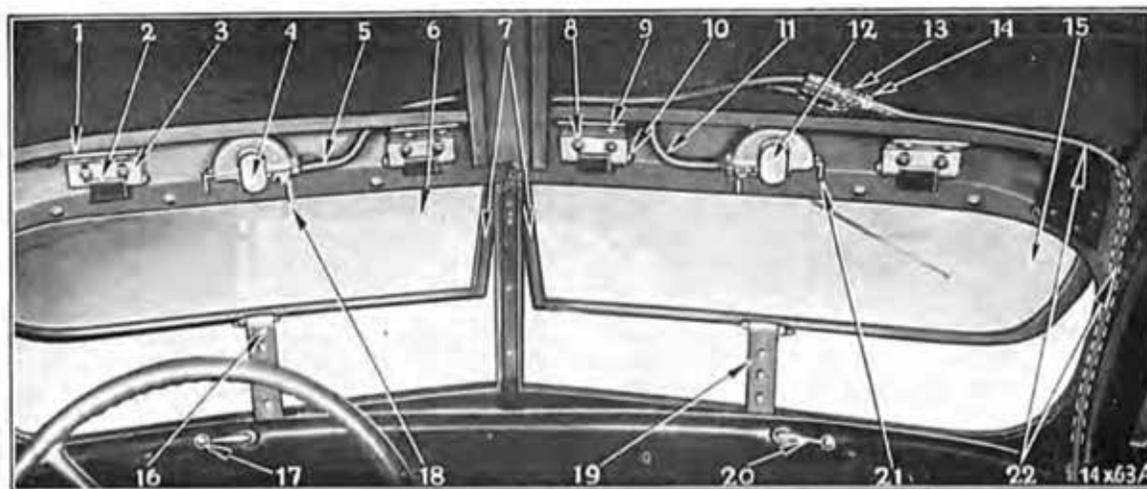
Complete Windshield Installation, with Trim Panels Removed
